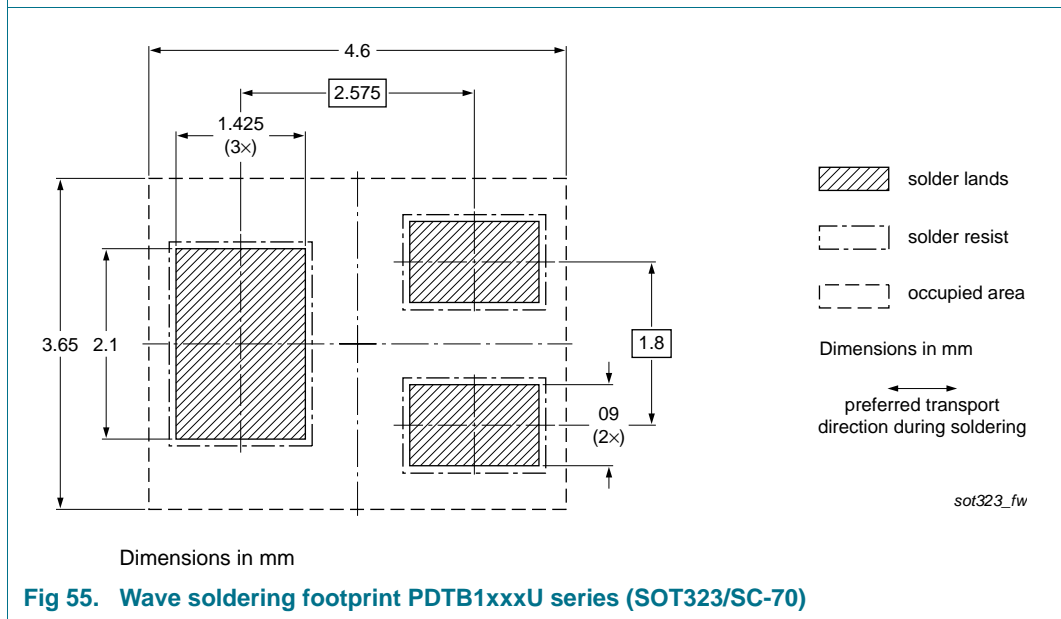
Wave soldering footprint PDTB1xxxU series (SOT323/SC-70)
